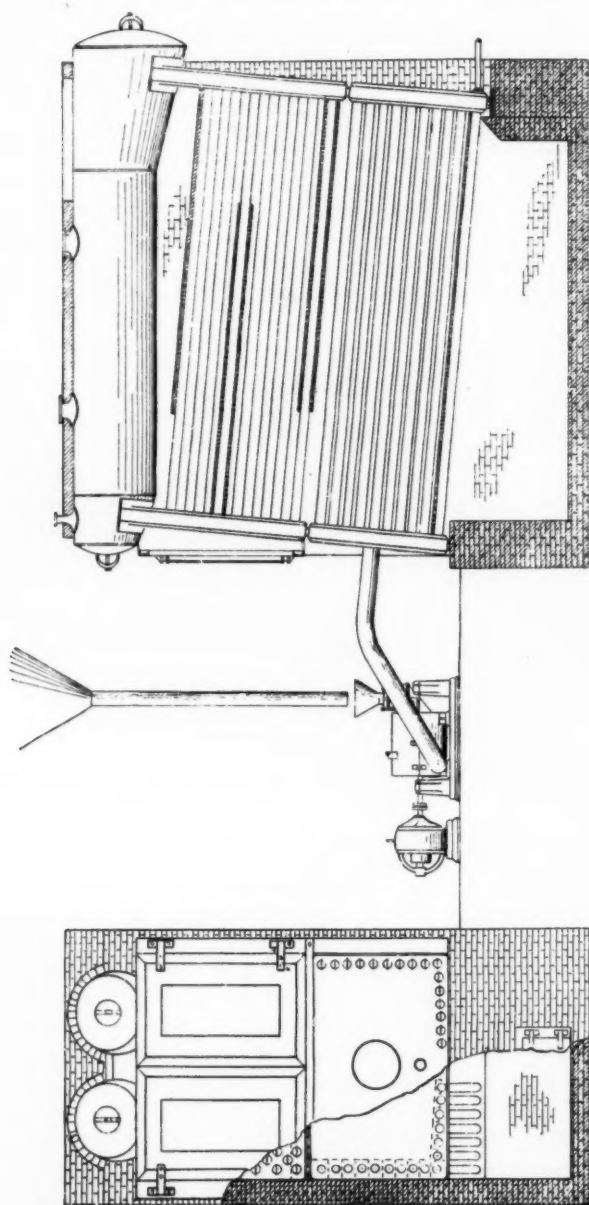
UNIT PULVERIZER COMBUSTION CHAMBER APPLIED TO A WATER TUBE BOILER.
